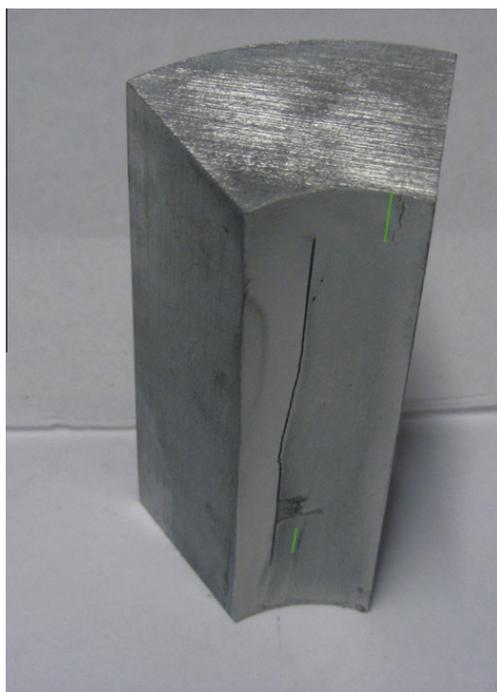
Sample taken from first fatigue crack, crack path along inner surface of thick walled tube.
